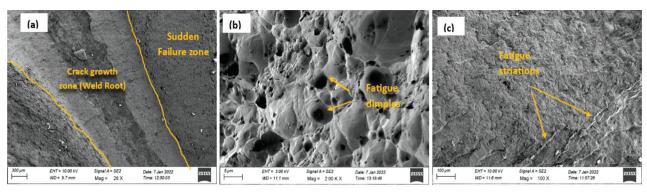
Fatigue fractograph of FWT: a) fatigue zones, b) magnified sudden failure zone, c) magnified crack growth zone
